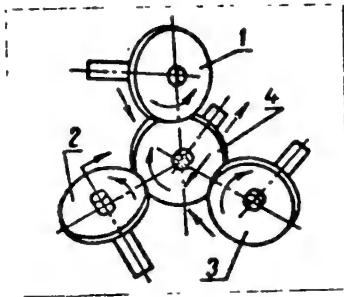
Diagram of Tooth Lapping on a "Komsomolets"-type Machine
